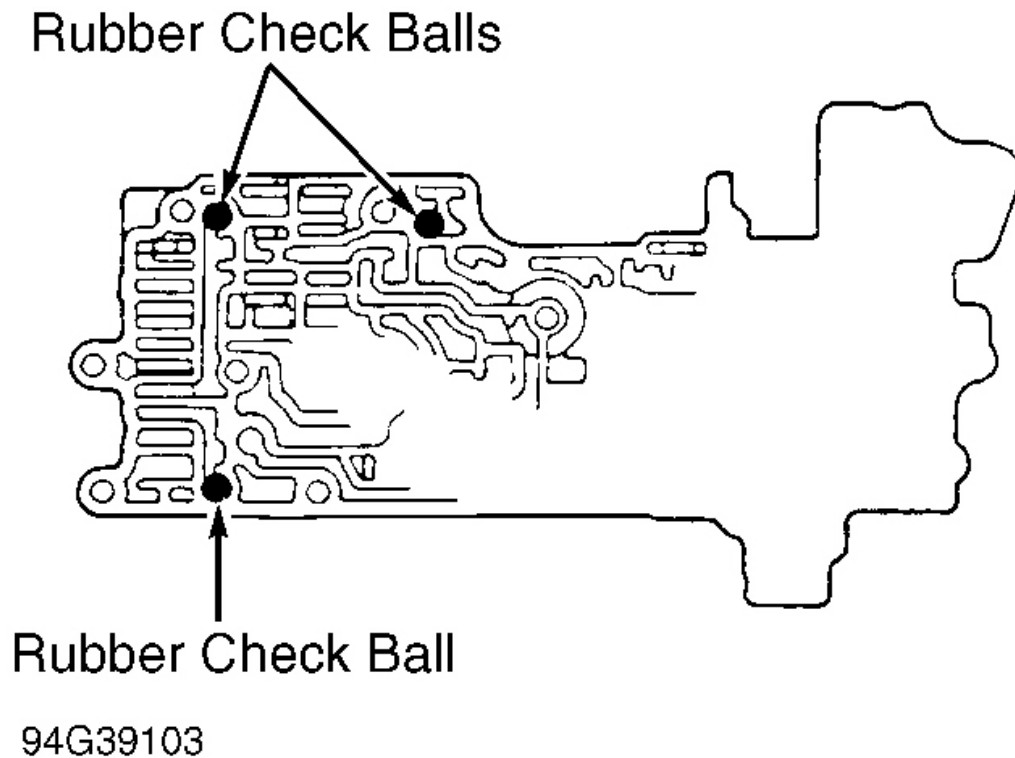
Locating Valve Body Check Balls & Oil Strainers - Main Valve Body (Topside)
